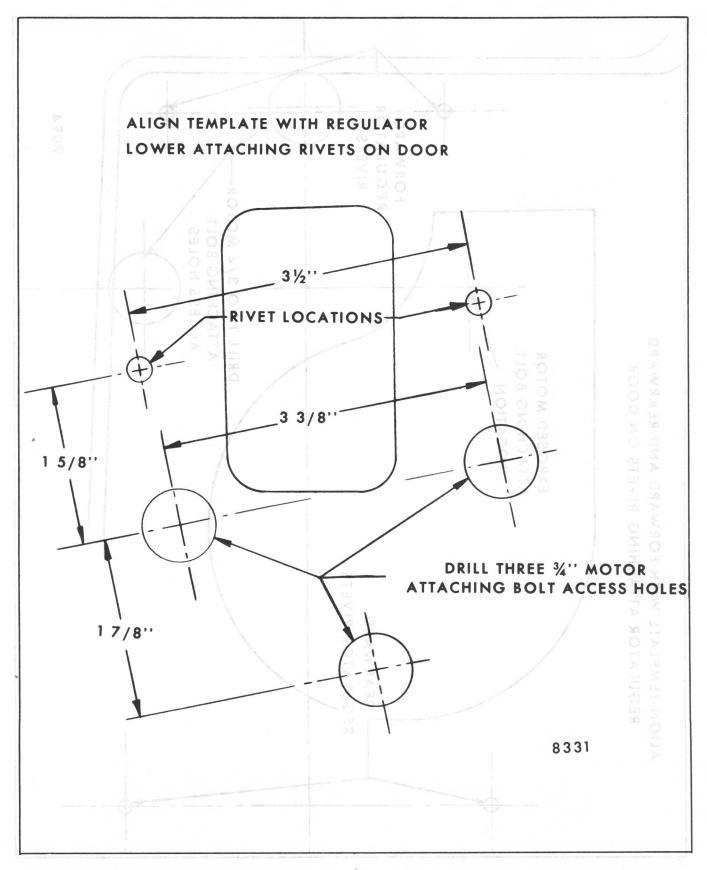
Window Regulator Lower Attaching Rivet Reference Points for Locating Window Motor to Regulator Attaching Bolts "X-69" Style, Rear Door
